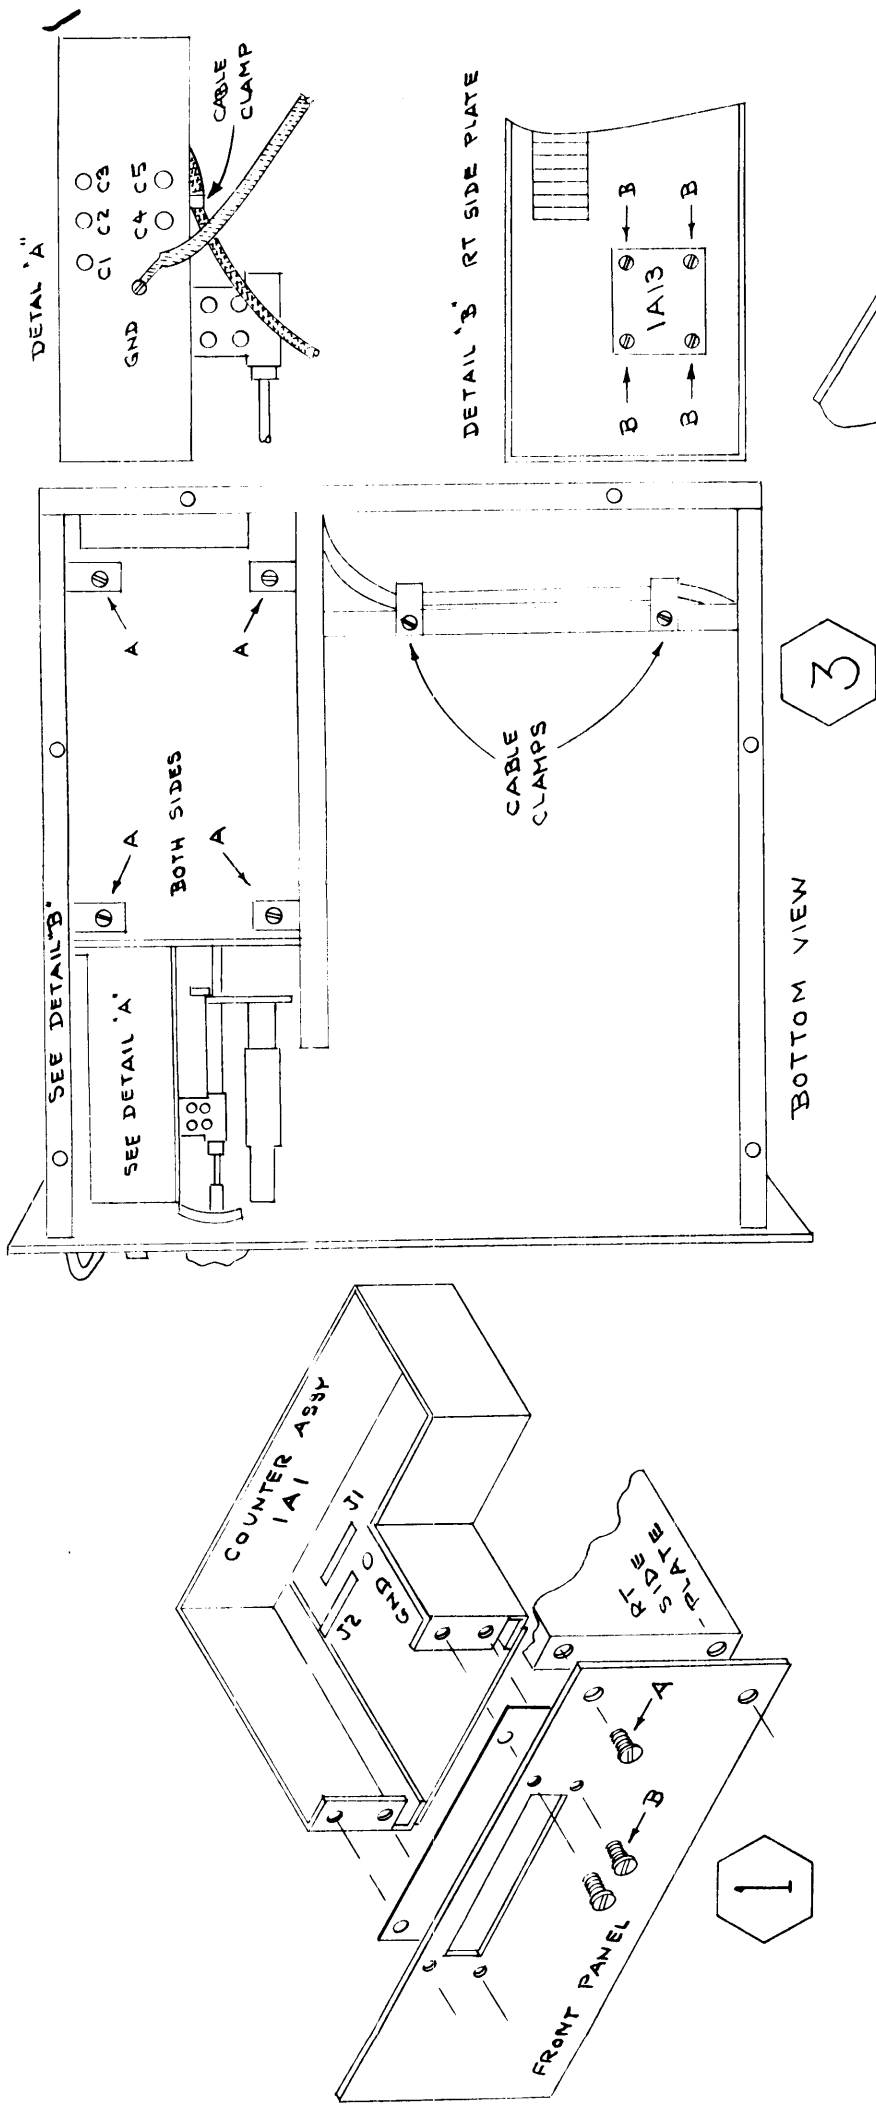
Removal of R. F. Tuner and Counter Assemblies
